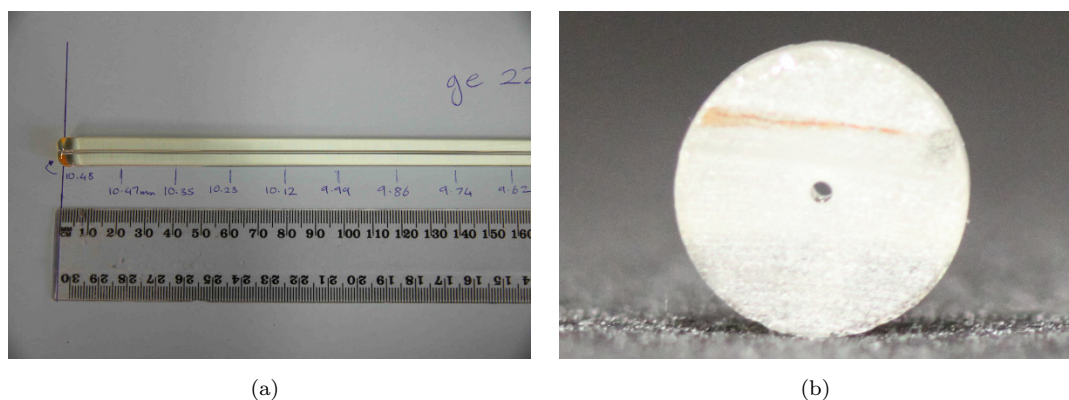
Example of a tube extrusion. The cross section shown in (b) has an outer diameter of 10.4 mm and an inner diameter of 0.8 mm.
